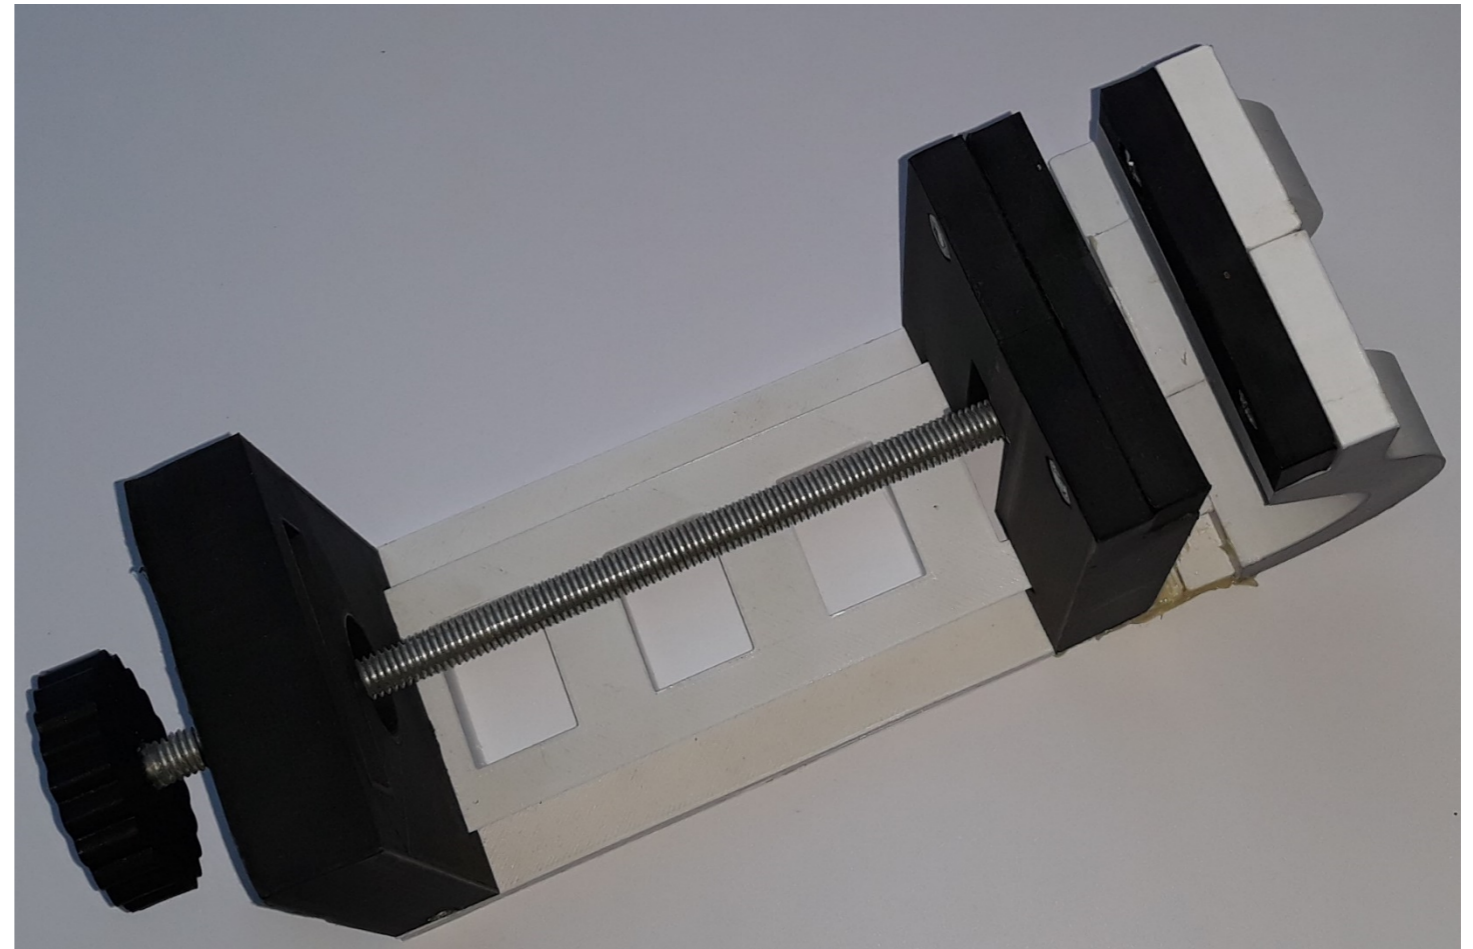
3D printed vise. Source: Ludor Engineering
